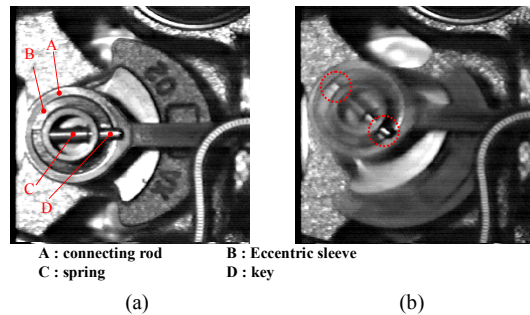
Photograph of the prototype: (a) at rest and (b) after latching.
